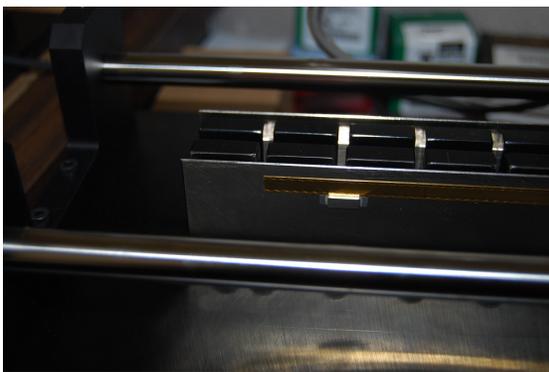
Close-up of optical encoder strip affixed to linear motor track assembly.
